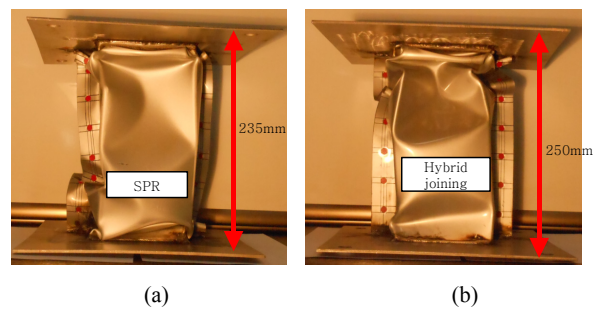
Deformed shape and dimension after the crush test (a) SPR (b) Hybrid joining
